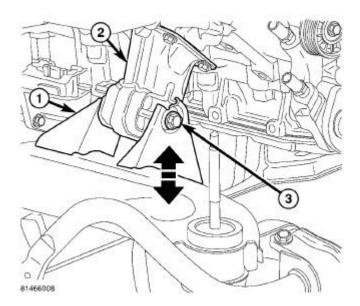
ENGINE MOUNT BOLT Courtesy of CHRYSLER LLC
